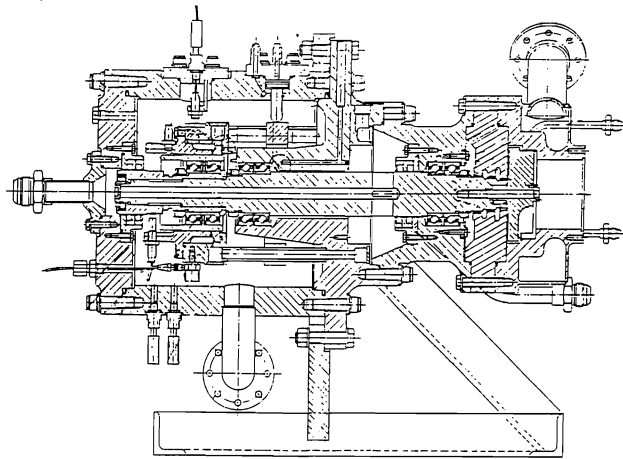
Cross section of tester. Test element shown is a hybrid bearing with ball and hydrostatic bearings in series (not tested).
